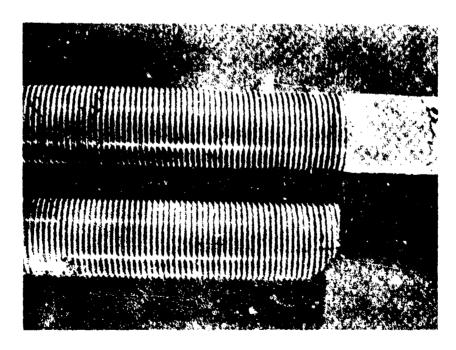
Radial and circumferential flaws revealed by dye-penetrant inspection.
